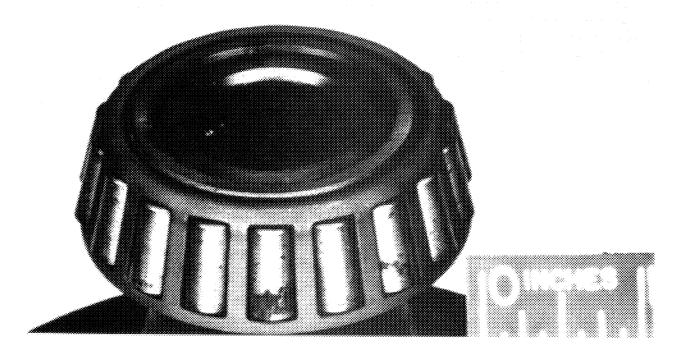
Spalled right output roller bearing and race (02008170).
